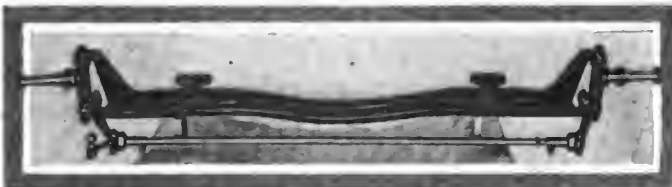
Die forged I section front axle with integral spring perches, stout knuckles, straight arms and a well-designed cross-rod
